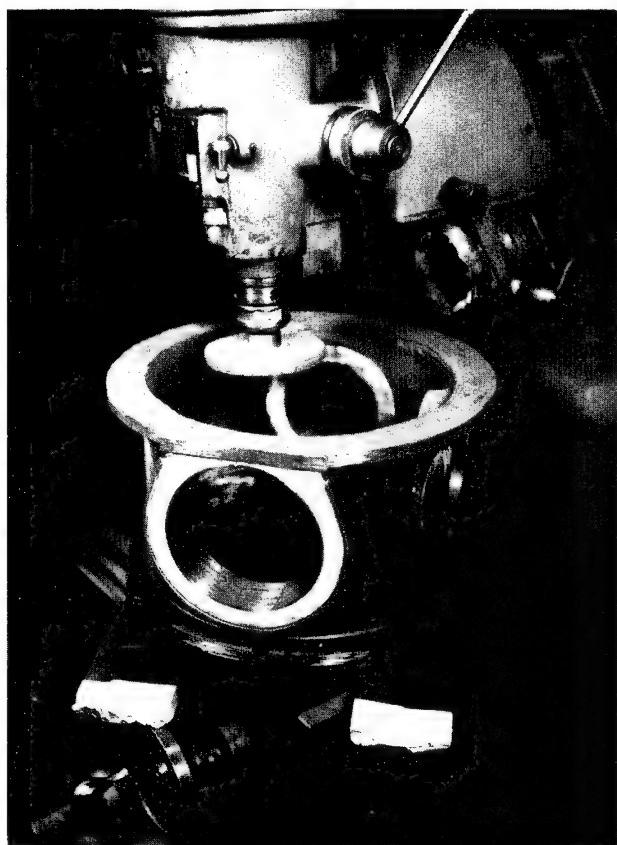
Machining of the Flanged Barrel Section of the Transmission Housing.
